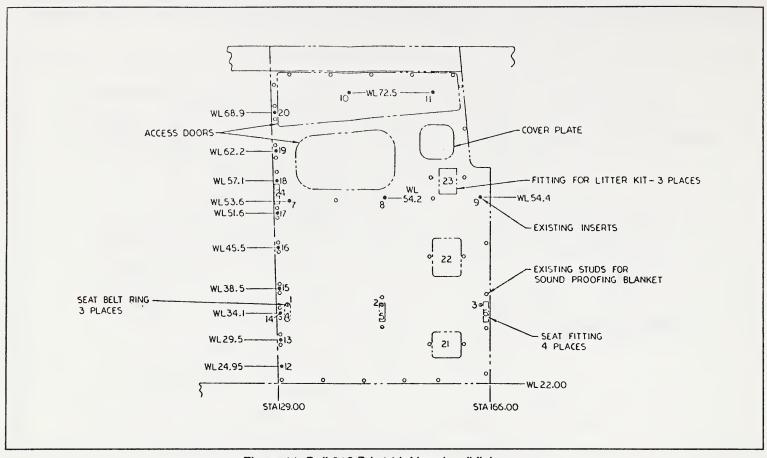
Bell 212 B.L.14 lefthand wall fittings.
